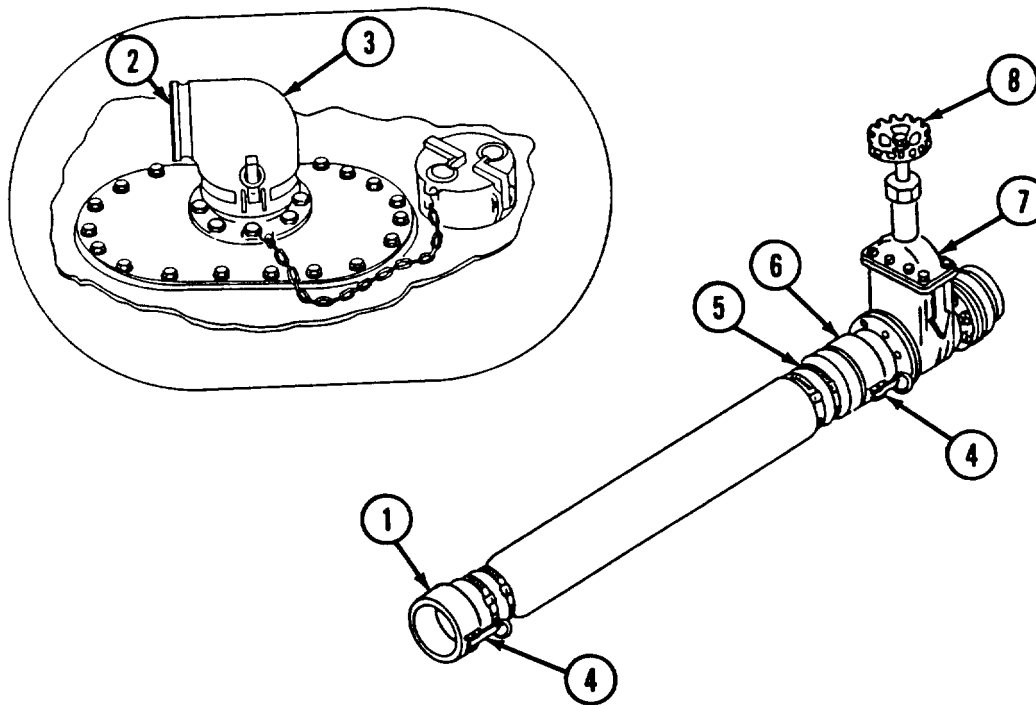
Filler and Discharge Hose Assembly and Filler and Discharge Valve Assembly
